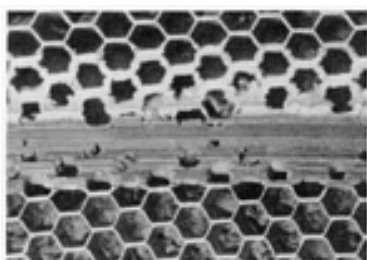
Open-faced honeycomb seal showing cutting by seal teeth
